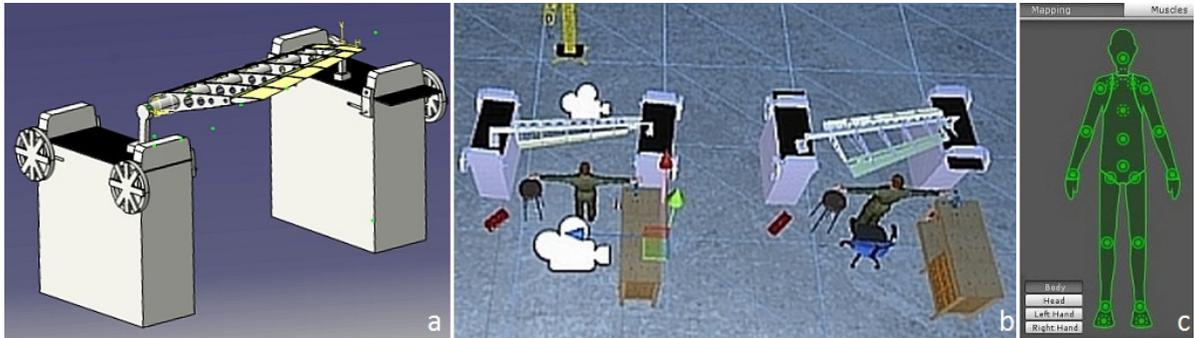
(a) Designed assembly jig holding wing spar frame (b) General view of the virtual scene (c) Avatar tracking points
